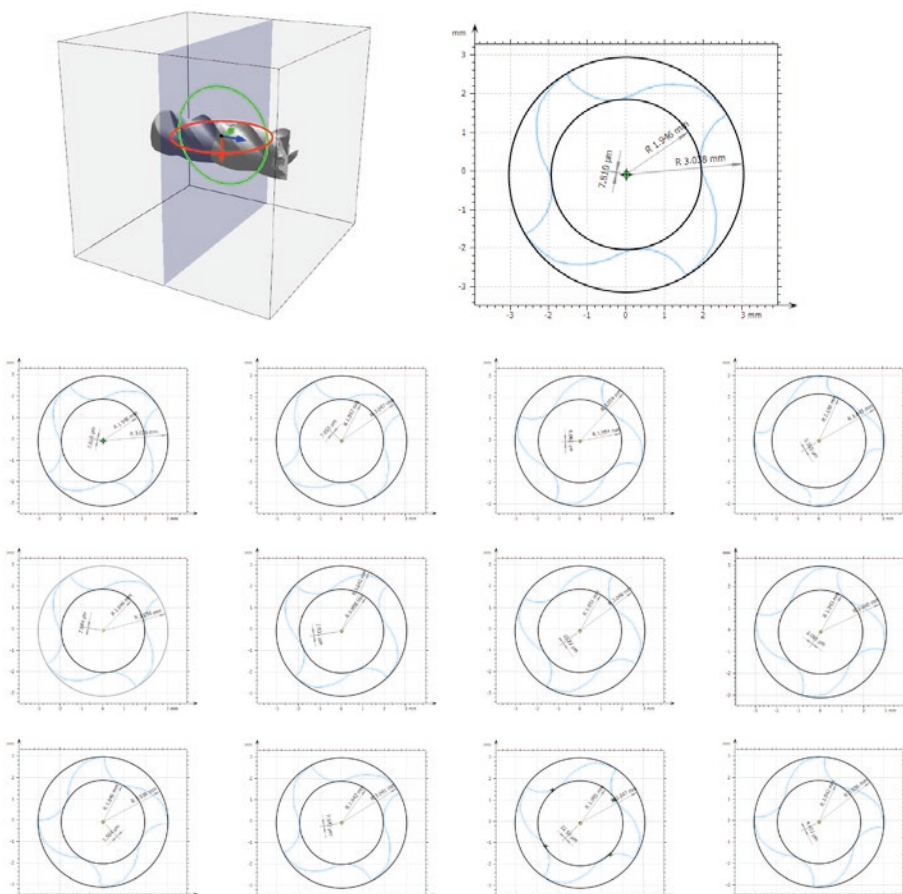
, cross-sections perpendicular to the tool axis are taken with a separation of 1 mm to check the flute's diameter uniformity.
